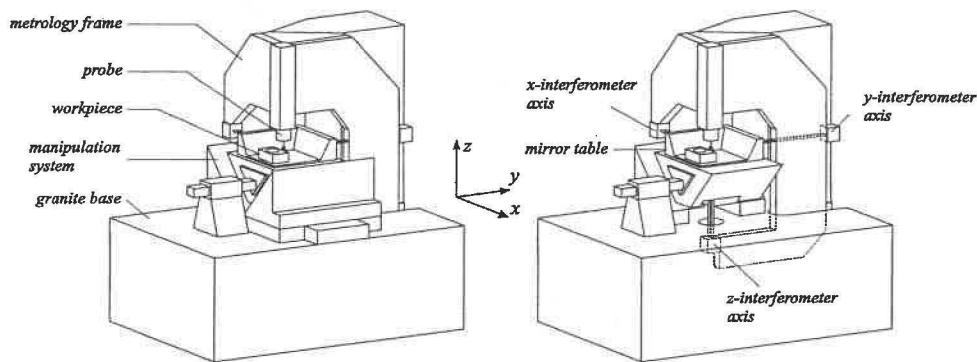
Schematic drawings of the ultra precision coordinate measuring machine. In the drawing on the right side, some parts of the manipulation system are removed to show the metrology frame and the position of the z-interferometer axis.
